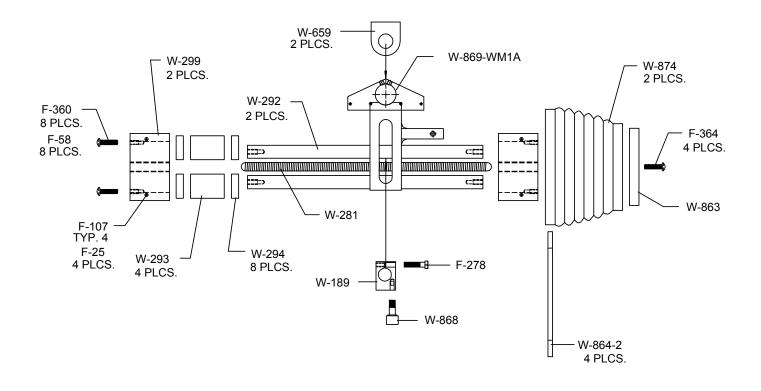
#### PLATE THICKNESS ASSEMBLY PART NUMBER LIST
